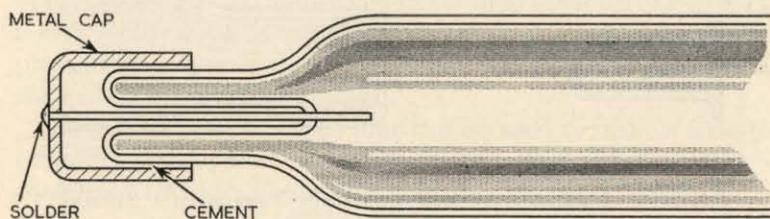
THE SEAL IS FINISHED WITH A SMALL METAL CAP
